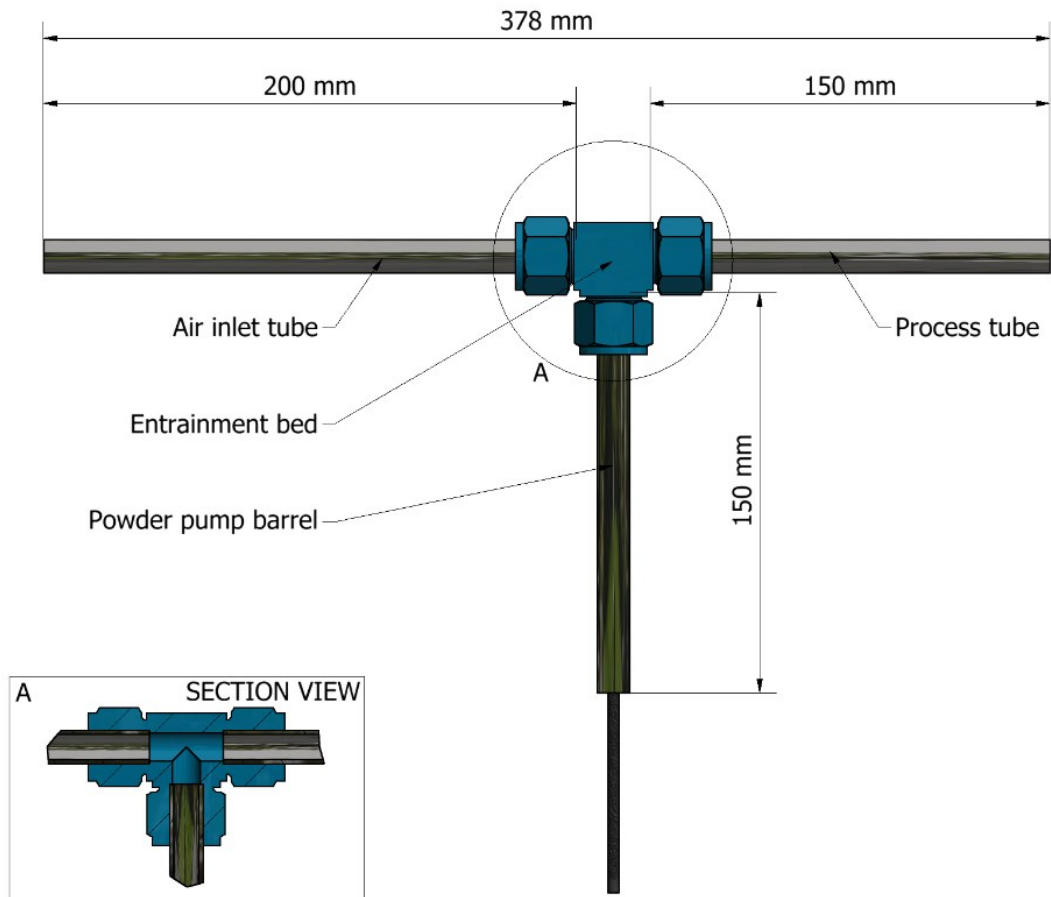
Overall dimension of powder pump and entrainment bed.
